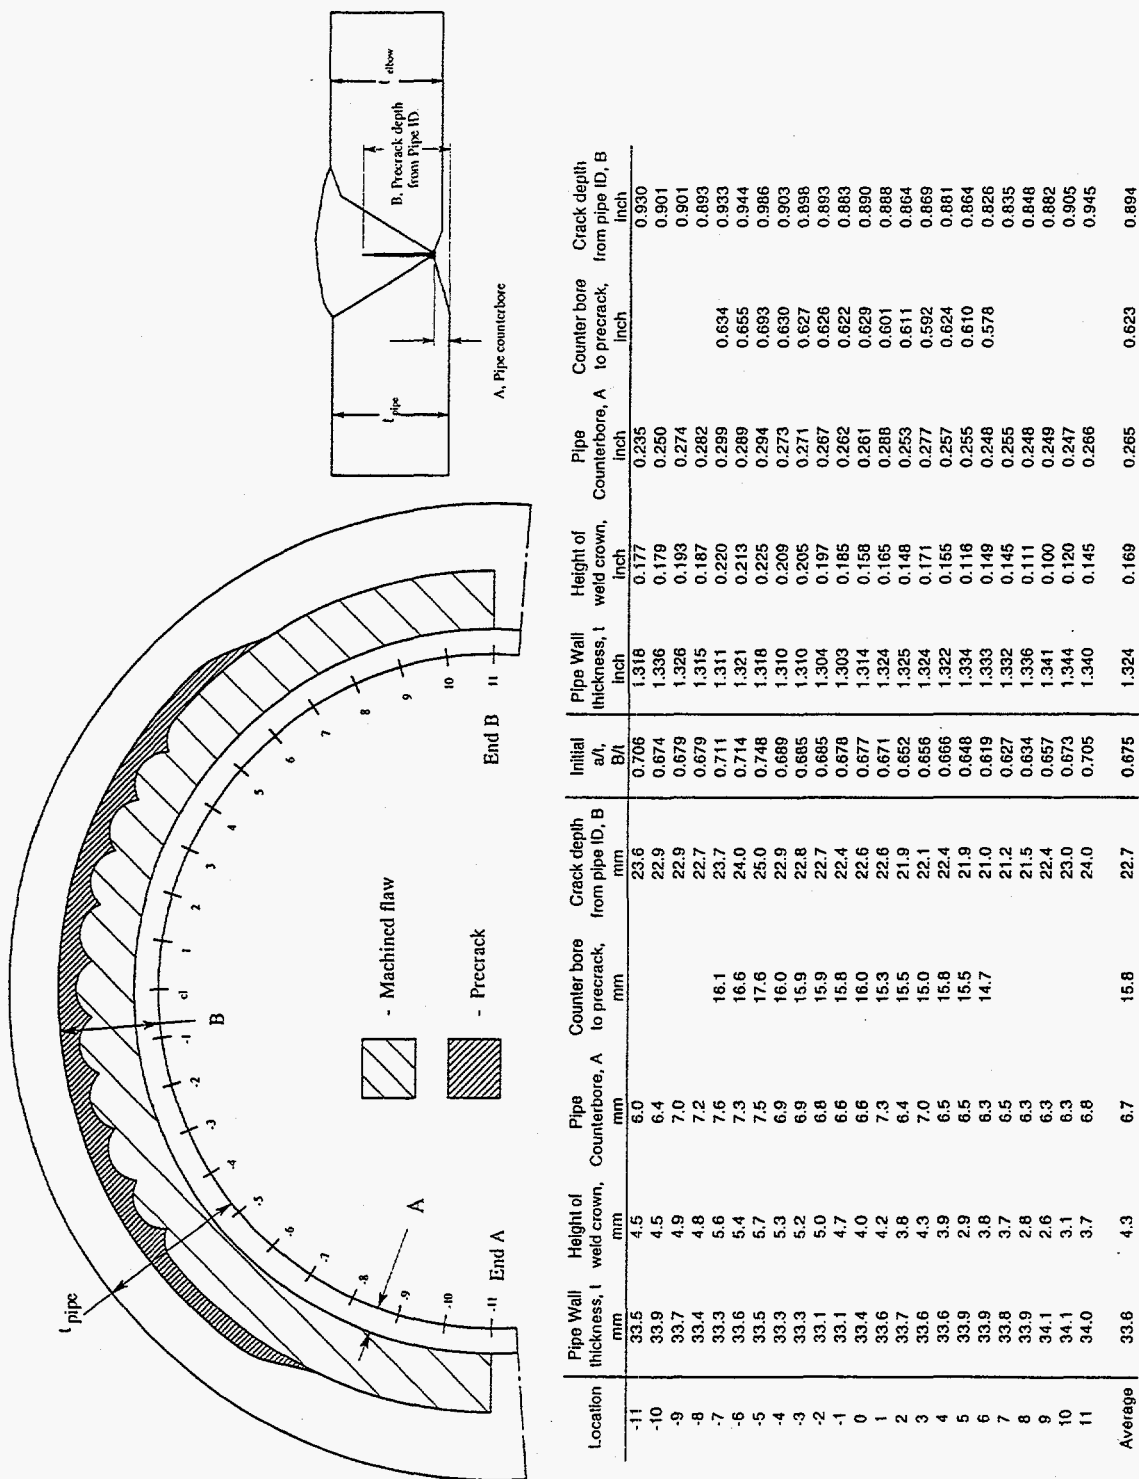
Post-test fracture surface measurements for Experiment 1-4
